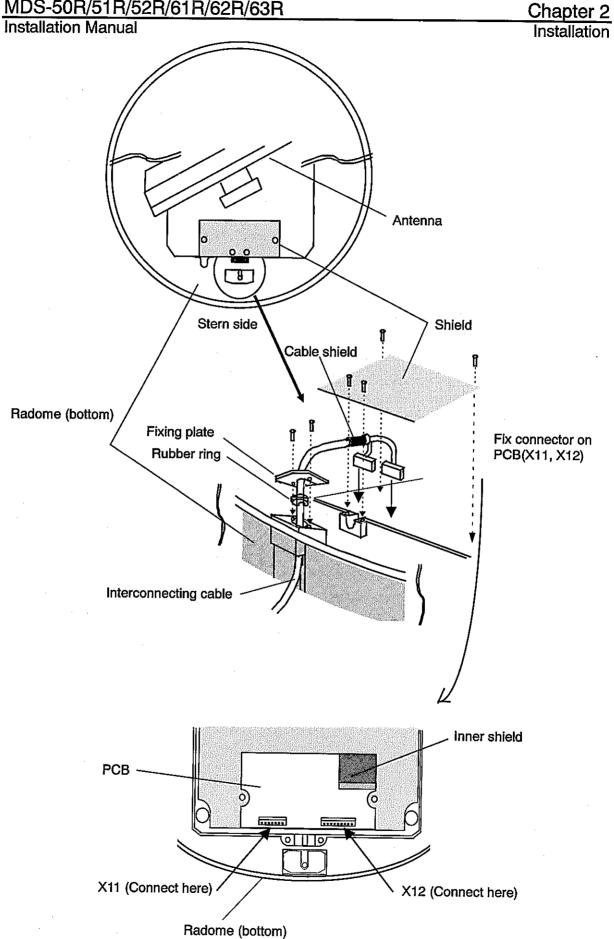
Fitting the interconnecting cable (Radome type RB715A)
